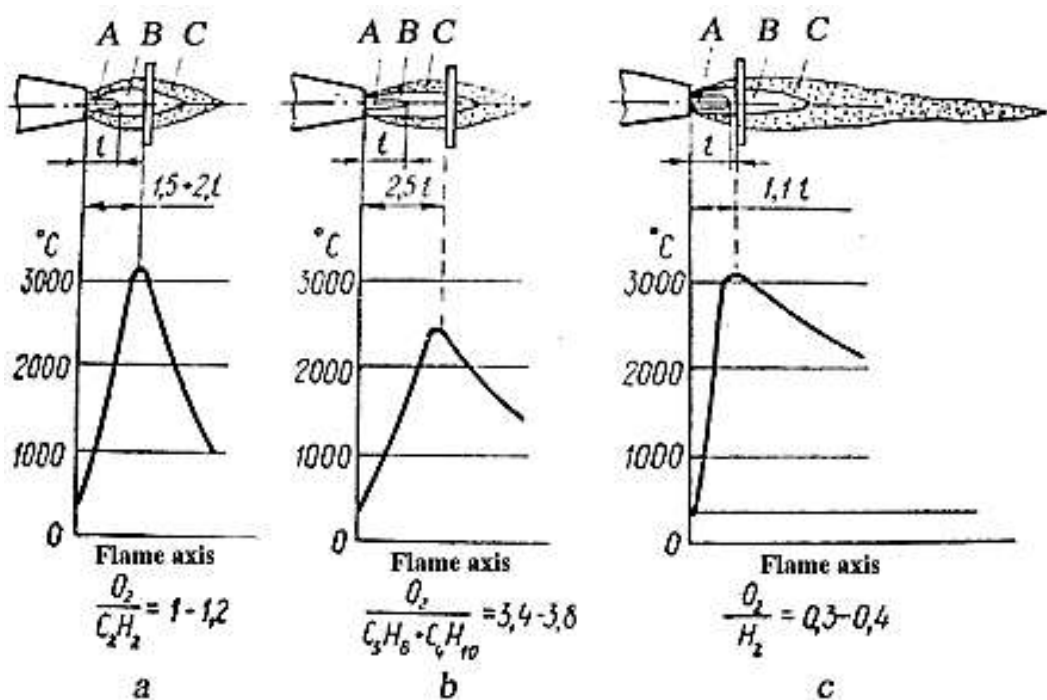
Construction of welding flame: a – acetylene-oxygen; b – propane-oxygen; c – hydrogen-oxygen; A – core; B – incomplete combustion zone; C – complete combustion zone; l – Length of core
